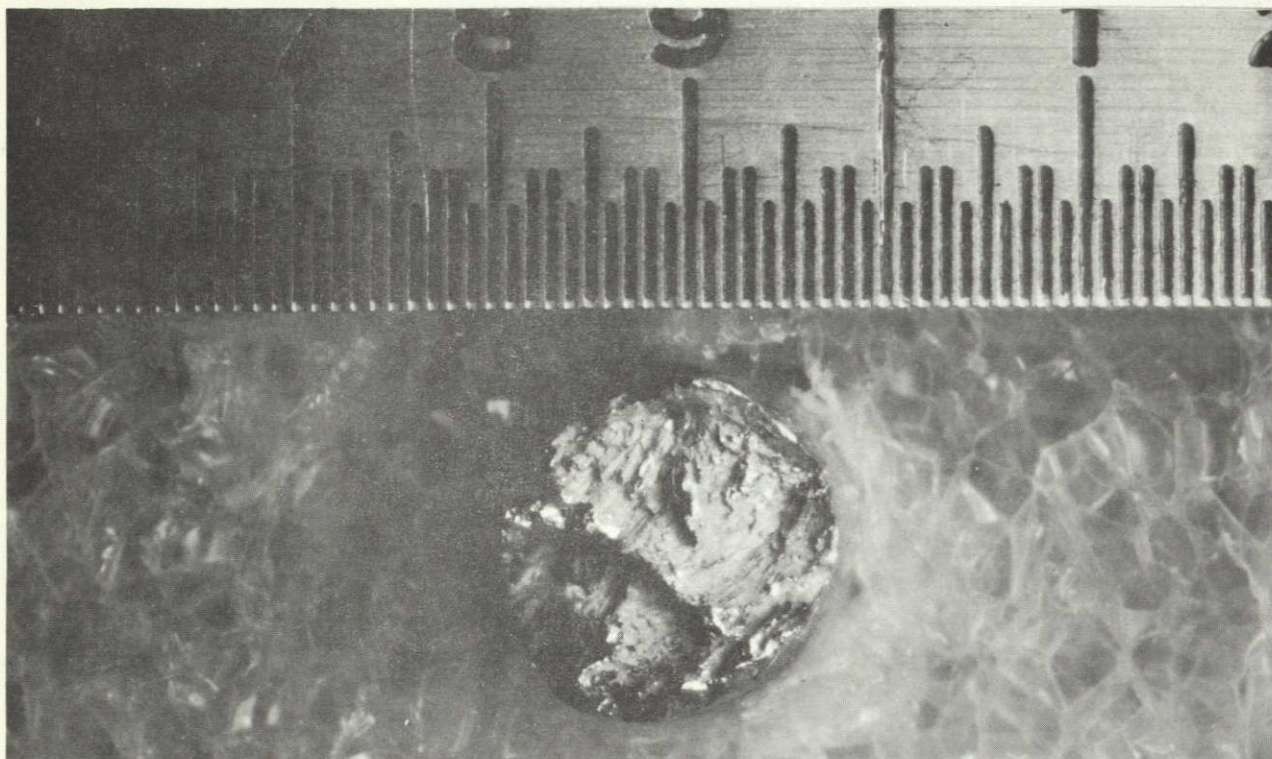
Macrograph (10X) of As-Welded Aluminum 7039-T61, Specimen AW-03: Control
